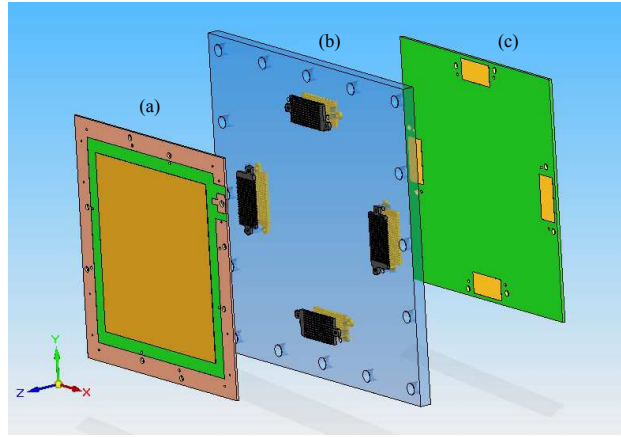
Zoom of the Readout PCB (*a* in the image), Leak-tight PCB (*b*) and the Interface PCB (*c*).
